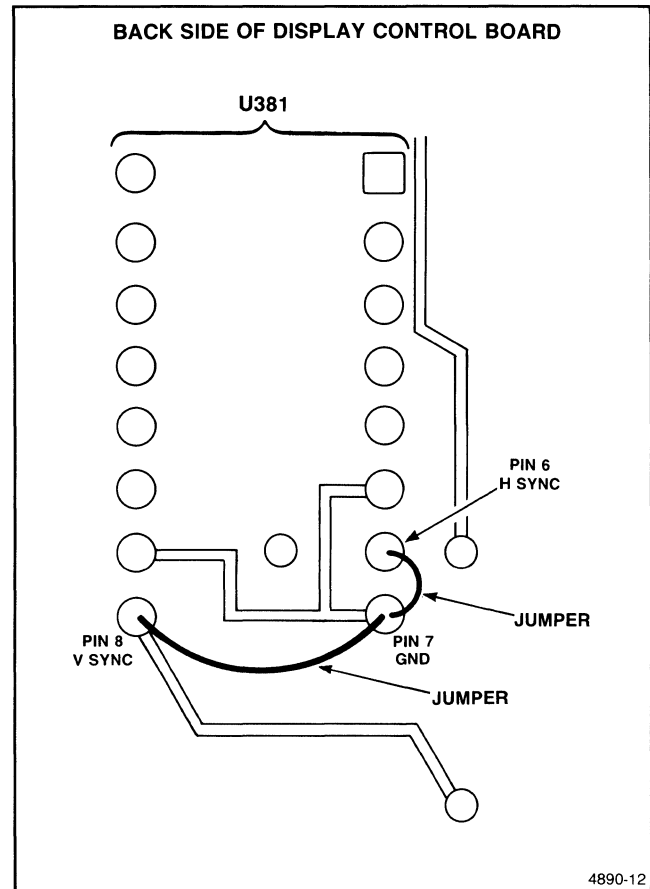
Jumpers on U381 To Remove Sync (Back Side of Display Control Board).
